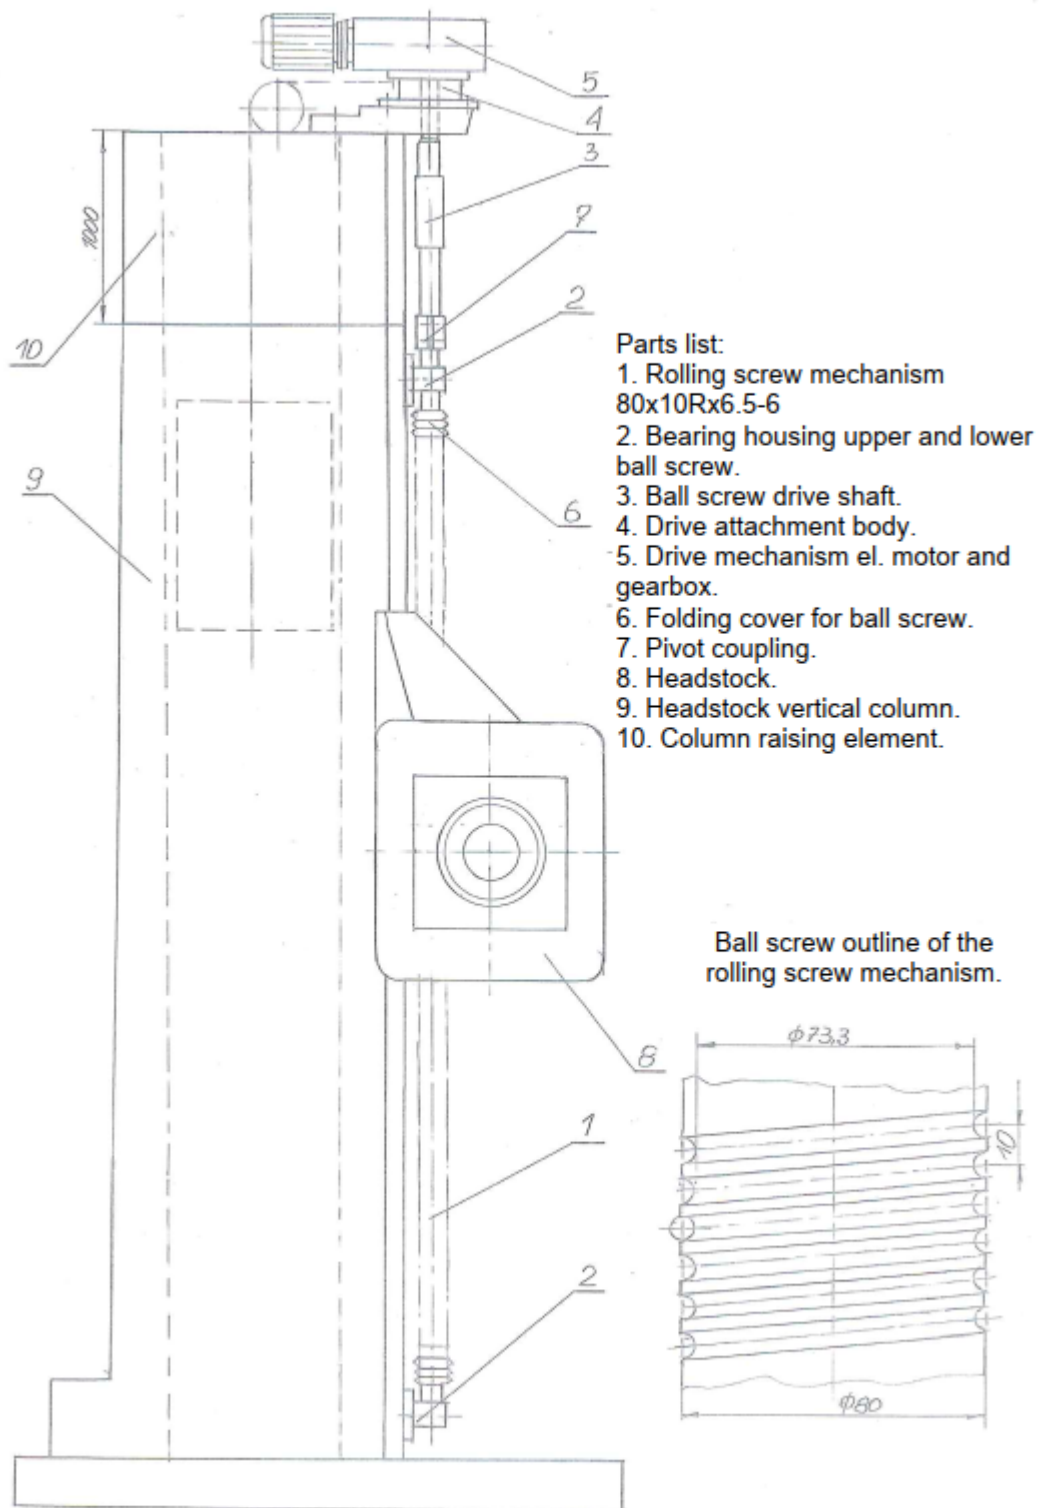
The rolling screw mechanism in the drilling and milling machine (own study)
